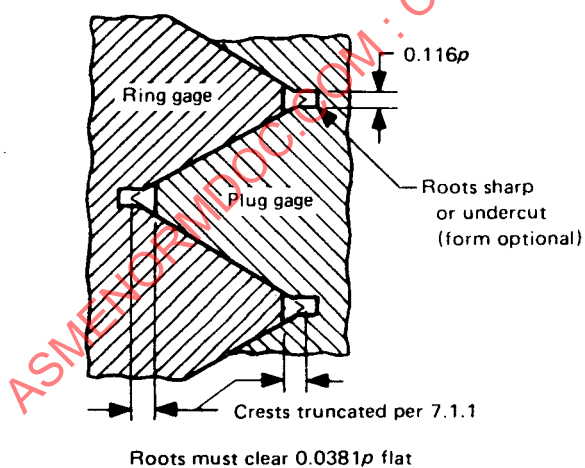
SUGGESTED FORM OF GAGE THREAD
